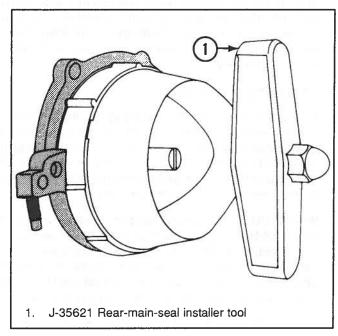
Installing One-Piece Rear Main-Oil Seal
